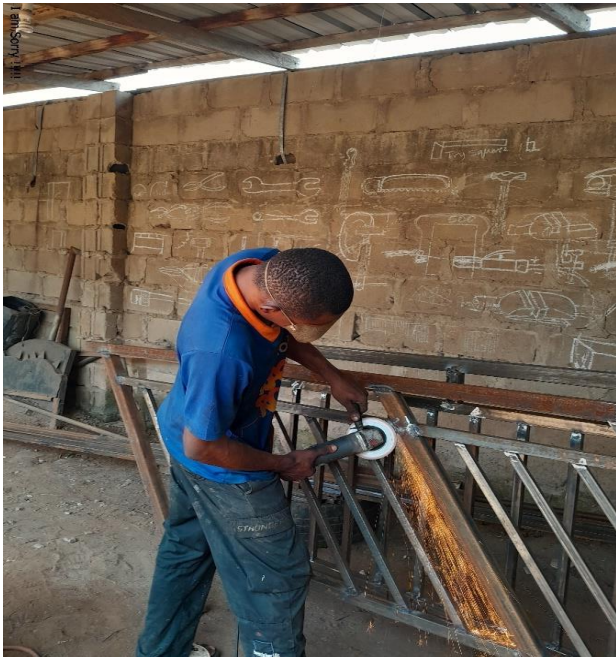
Artisanal Metal Fabricator using Grinding Machine (Source: Sanusi Engineering. Ent. ltd, Ogun State)
